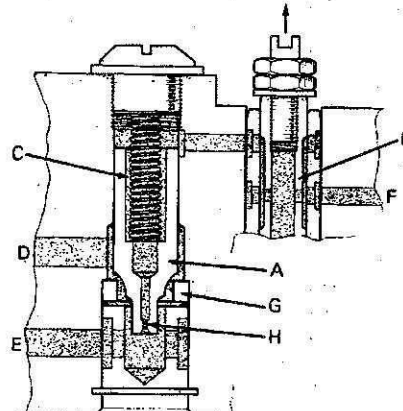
View showing pressure balanced valve operation. With spool valve (B) passage (F) open, fluid pressure above valve is lowered as flow through metering hole (H) is not sufficient to overcome loss through open spool valve. Thus, pressure in passage below valve pushes plunger (A) away from seat (G) allowing oil to flow out passage (D). Fluid flowing through metering hole flows out through passage (F).
